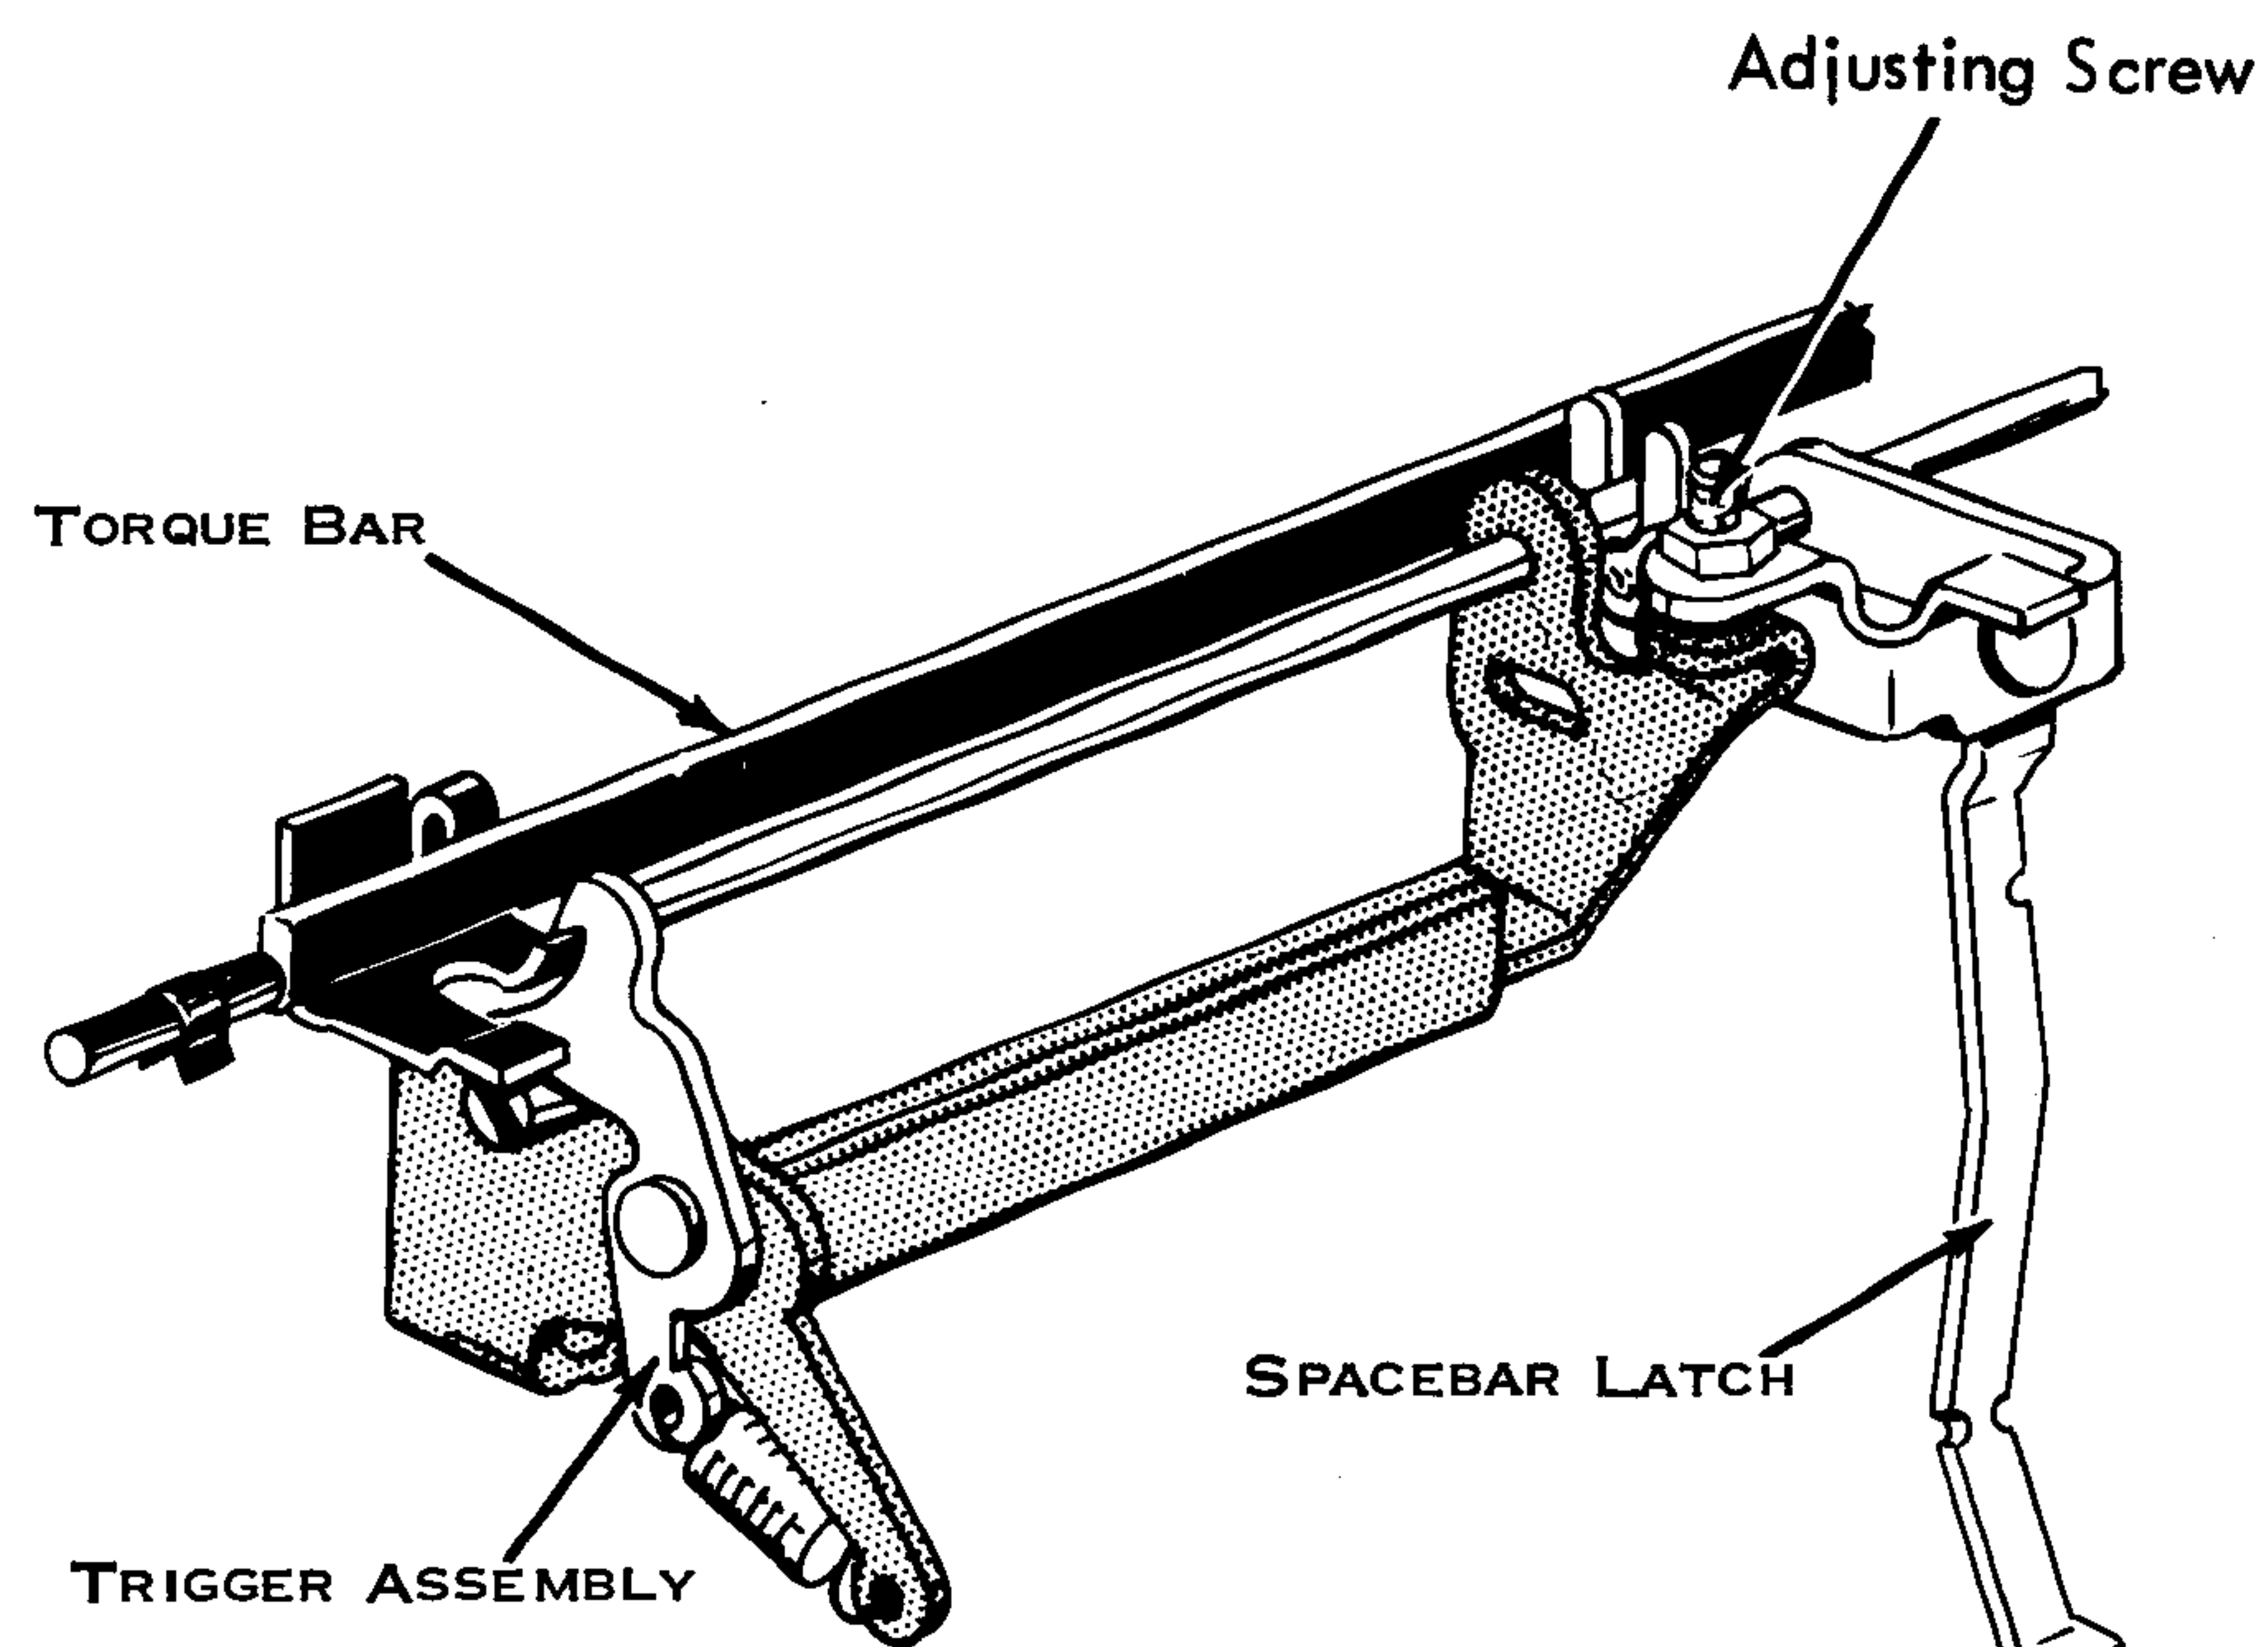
Spacebar Latch Lever Screw, 15" Machine
